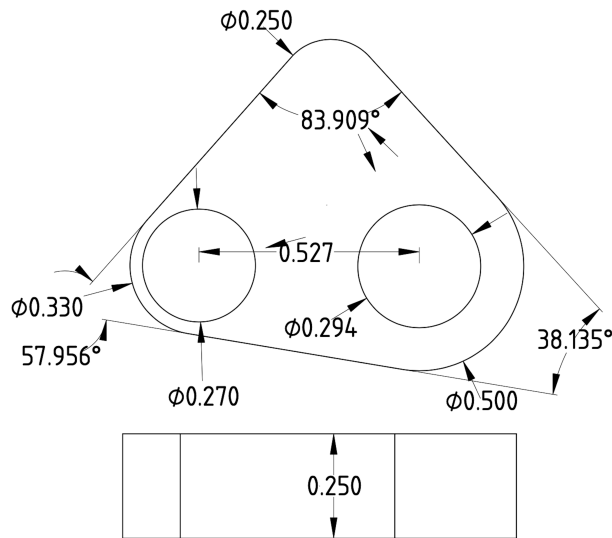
Engineering drawing of PTFE linear guide. STEP file included for laser or CNC cutting. Units are in inches.
